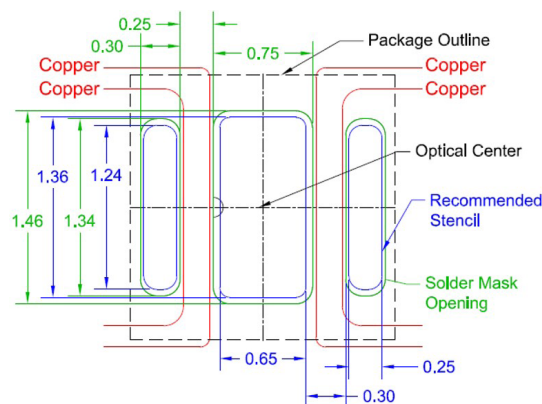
Recommended PCB solder pad layout for LUXEON C ES Color Line
